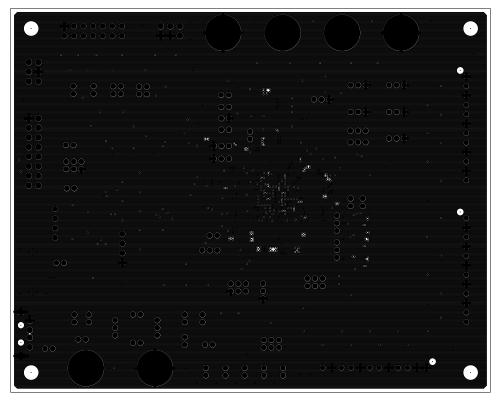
KIT34708VMEVBE (Rev. B) Inner 1 layer Layout
